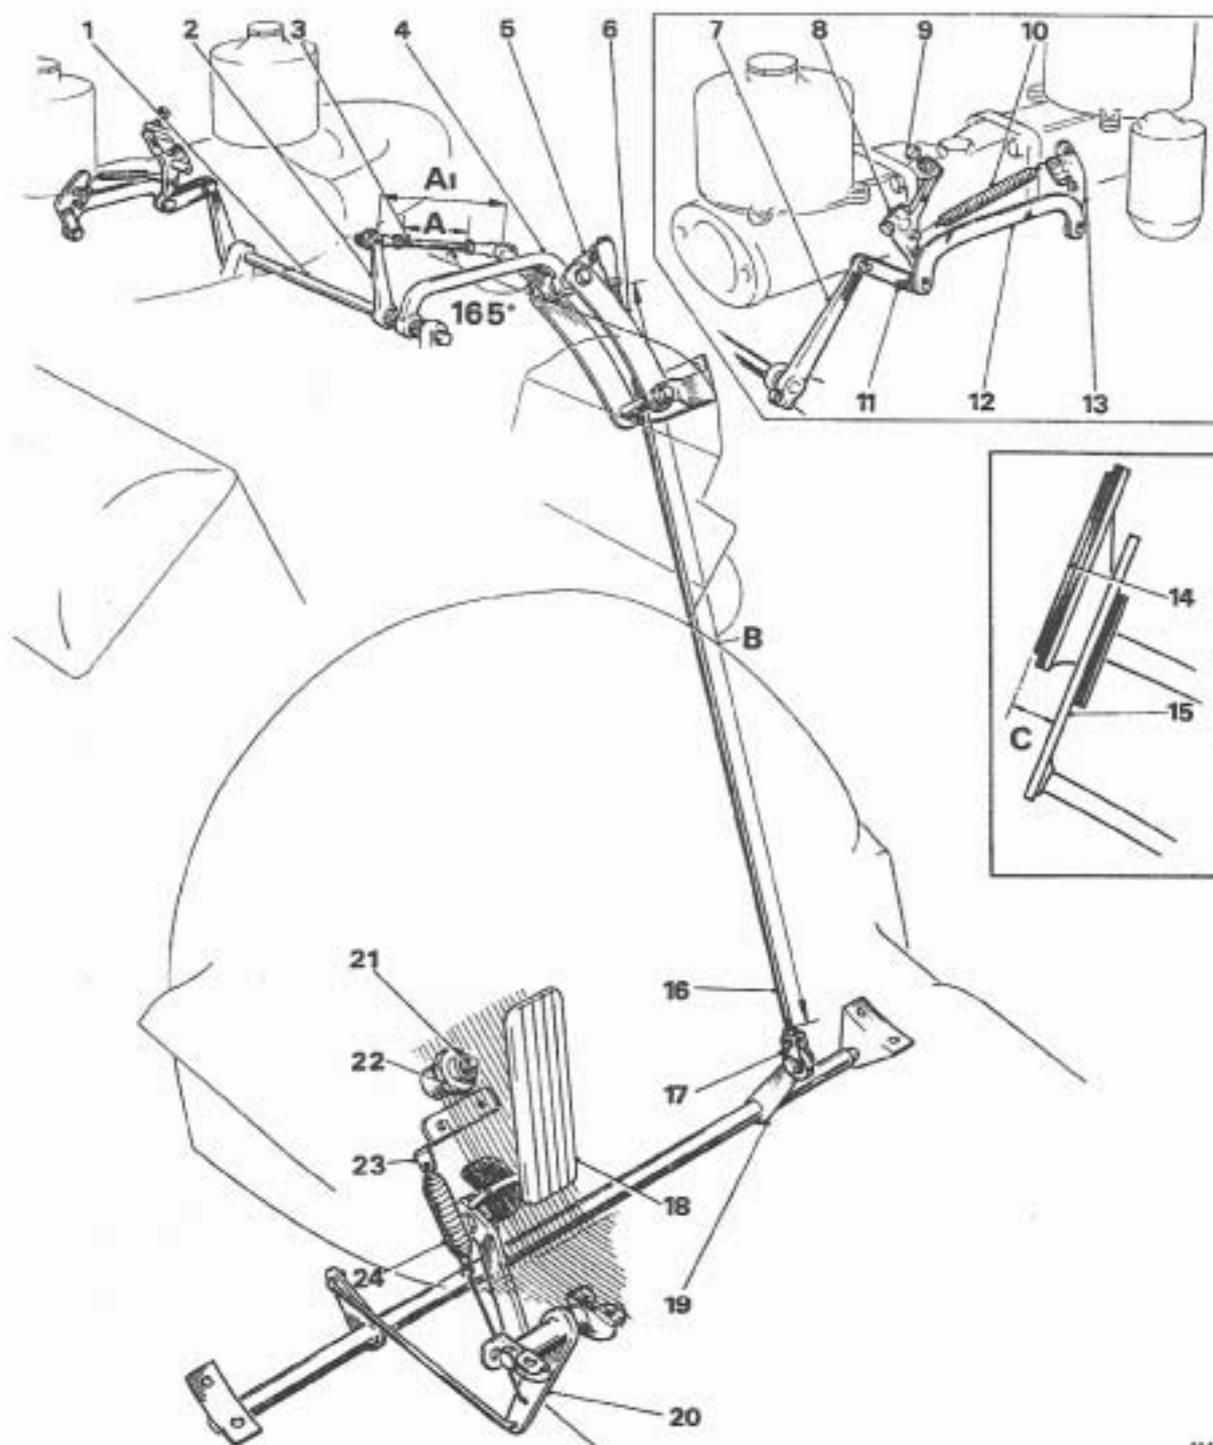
ADJUSTING THE DAMPER AND SWITCH
